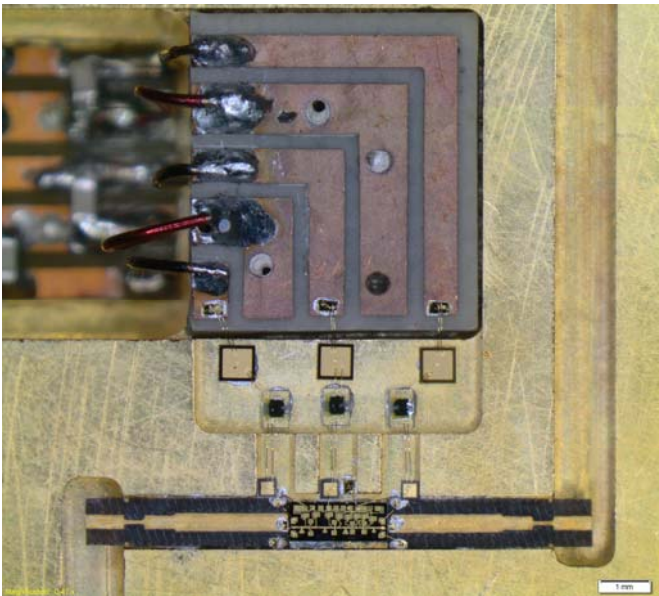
View in Detail of WR-10 Waveguide Assembly of LN4-110
